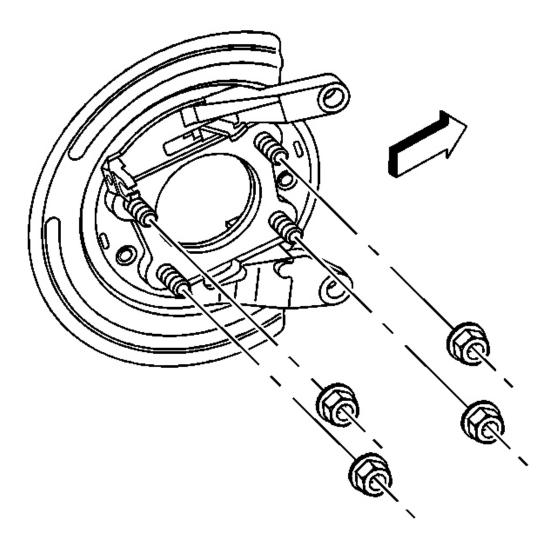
View Of Backing Plate & Nuts - Rear Courtesy of GENERAL MOTORS CORP.
